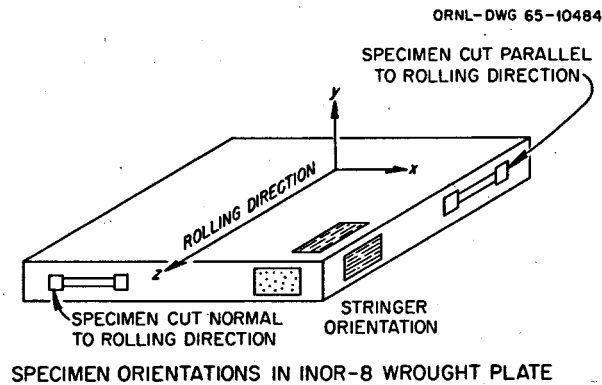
Sketch showing orientations of stringers and specimens for wrought metal and transverse weld samples.
